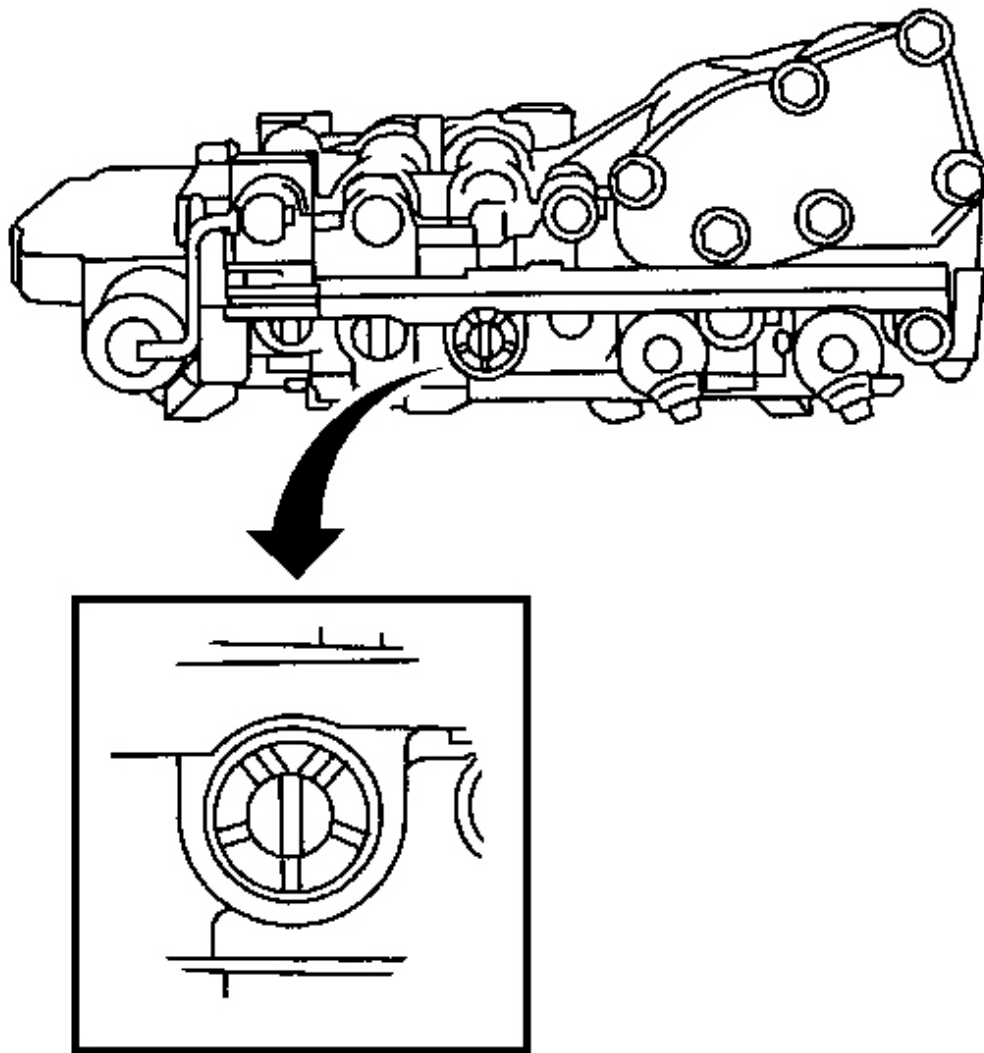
Primary Regulator Valve Sleeve, Plug & Pin
